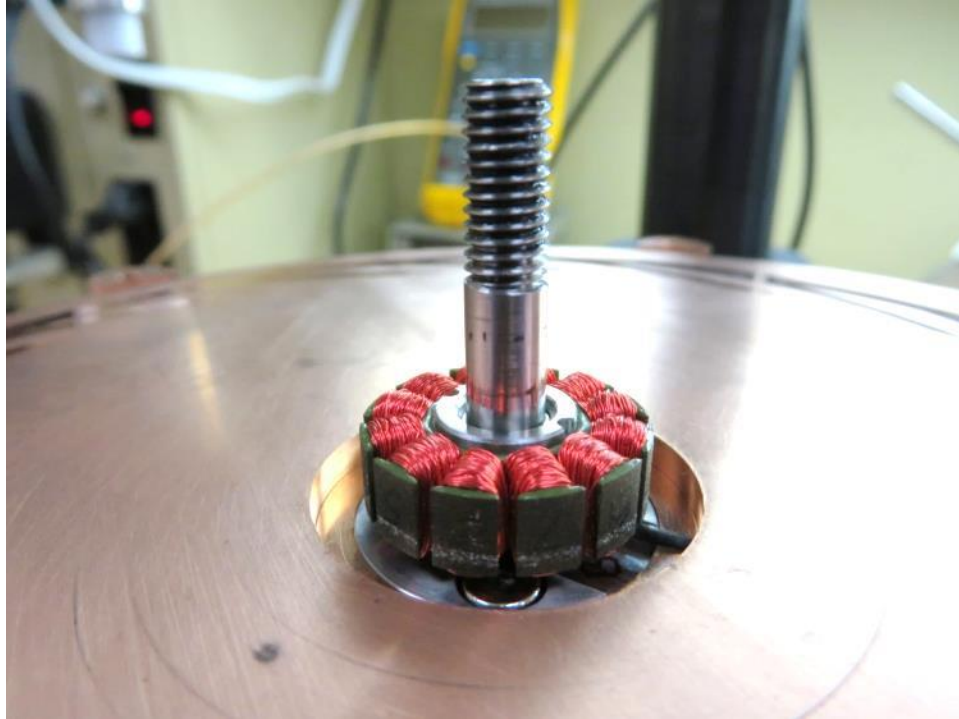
Motor stator and shaft assembled to the baseplate
